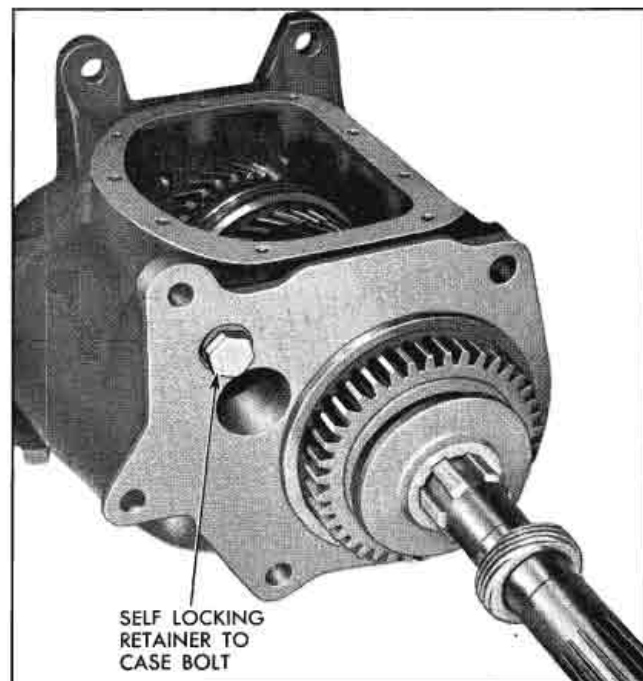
B-31 Self-Locking Retainer to Case Bolt
